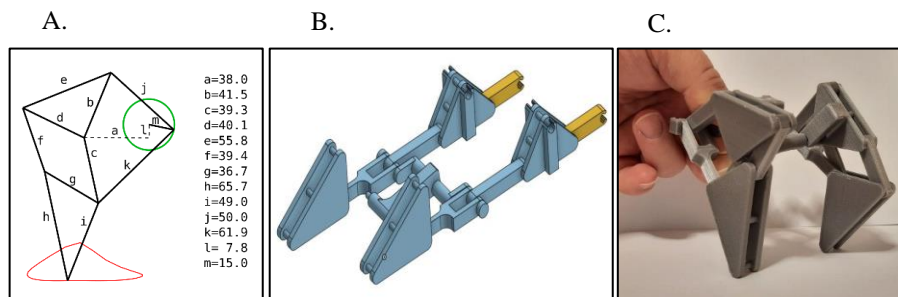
A. The Jansen's leg structure and motion profile; B. A CAD model of a two-legged mechanism; C. The printed prototype.
